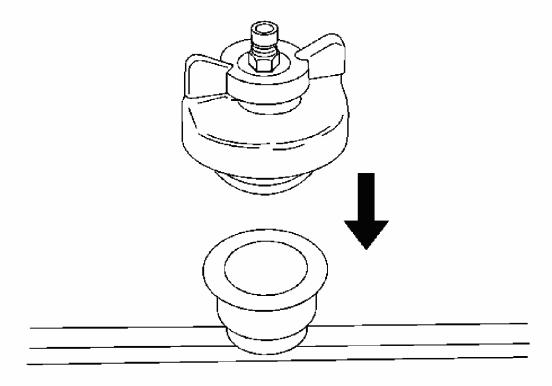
Attaching Van-N-Fill Cap To Vehicles Coolant Fill Port Courtesy of GENERAL MOTORS CORP.
